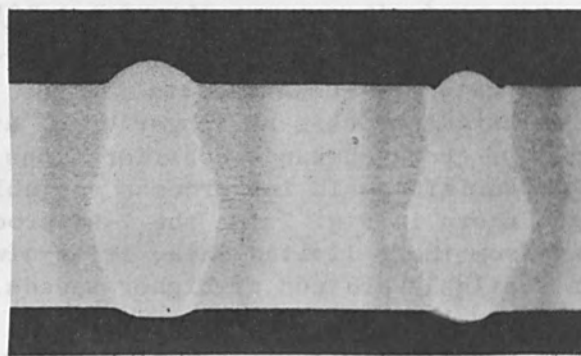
Classification of welds, 3/8-in. plate.
